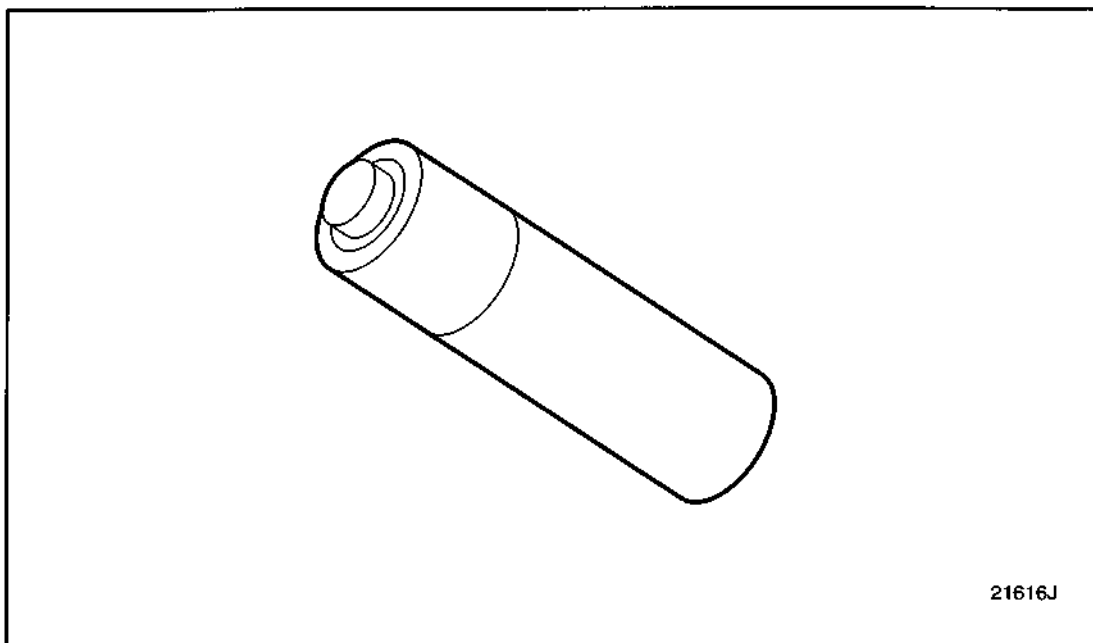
Car Plug Install-Rocker Arm Shaft,J36326
